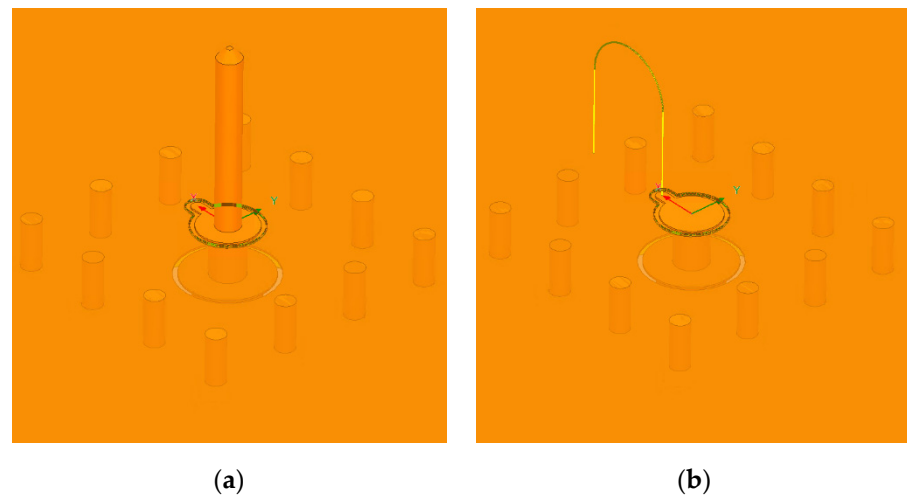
Simulation models of the test PCBs: (a) E-PCB; (b) H-PCB.
